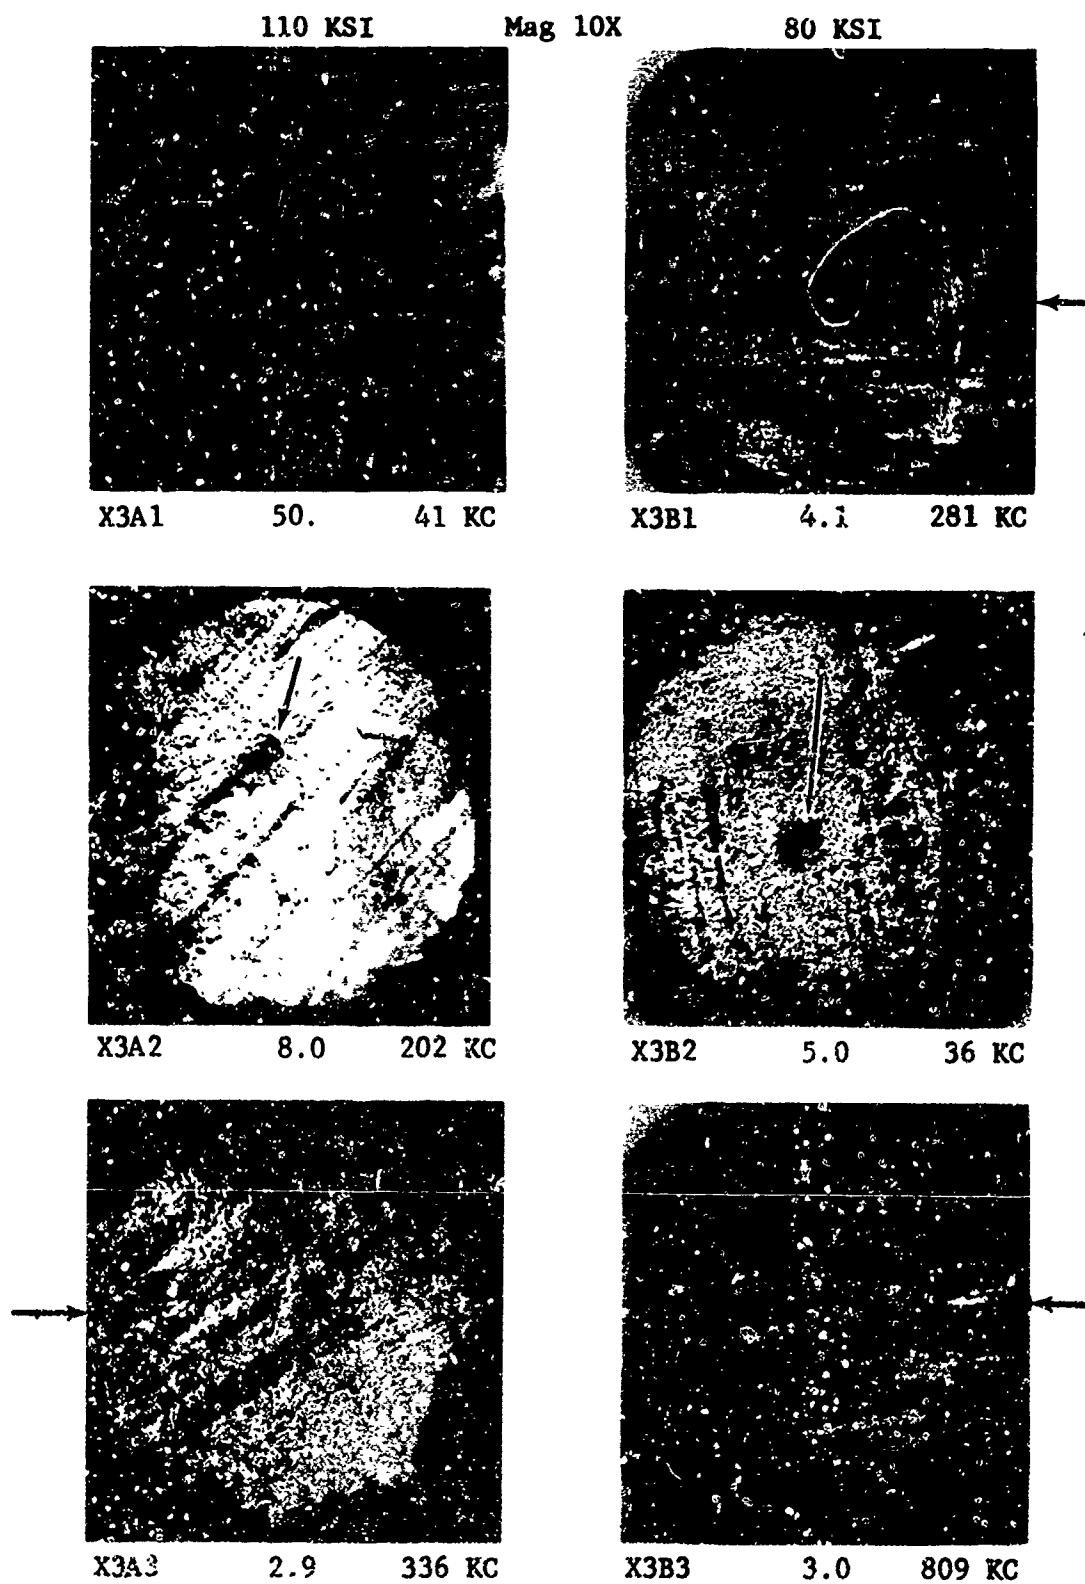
Fracture Surfaces of Failed Fatigue Specimens Series X3-
